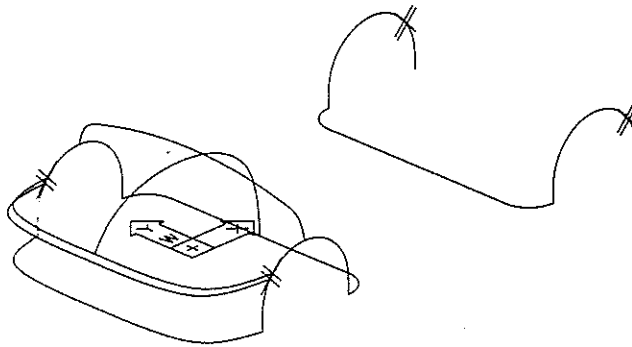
Front bumper surface hidden, wires and points mirrored
